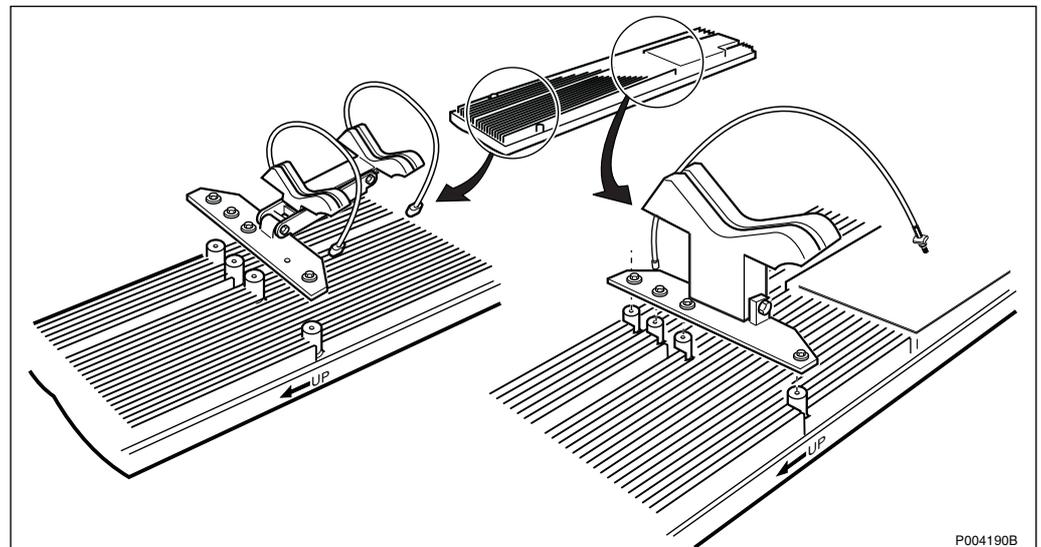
Attaching the upper and lower mounting fixture to the Base antenna and TX antenna (1250 W EIRP)
